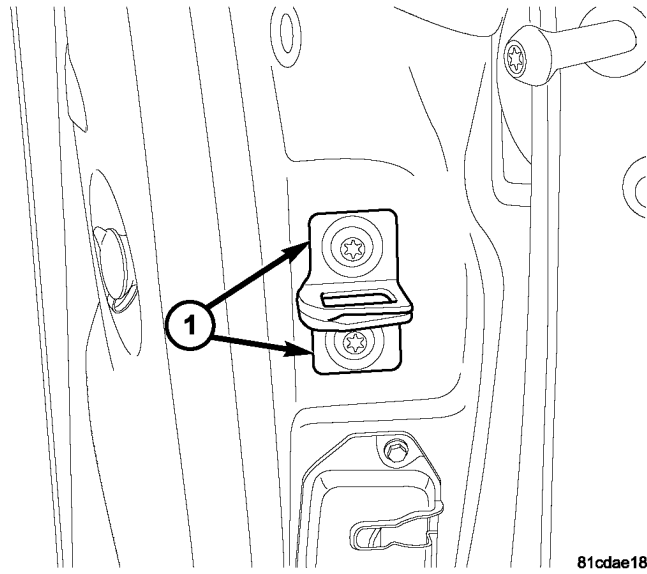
STRIKER, MARKED AROUND OUTSIDE
